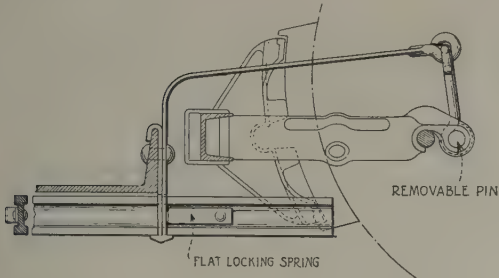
Atlas Brake Beam Safety Guard and Third-Point Support. American Steel Foundries. Fig. 1362—Elliott Safety Hanger. American Steel Foundries.
